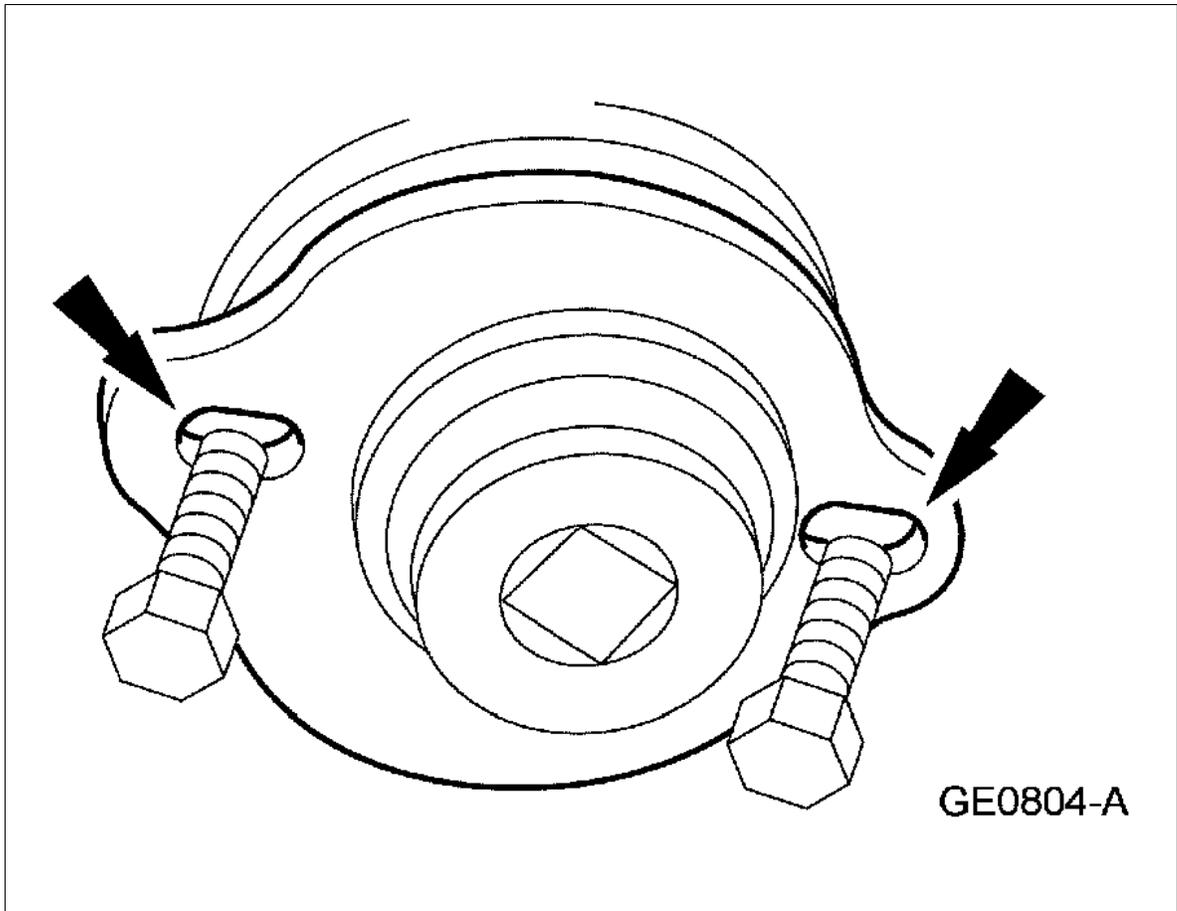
Positioning Driveshaft Plate Onto Drive Pinion Flange Runout Gauge
